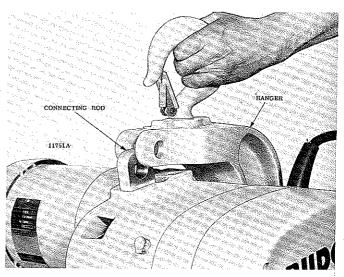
3 Ton Hanger Bracket Connection Pin Removed
